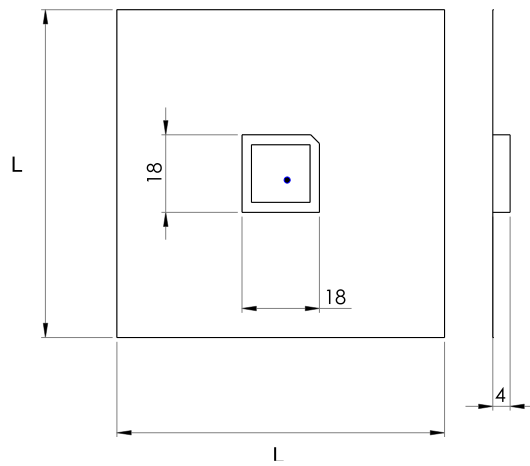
Drawing of the patch with the relevant dimensions (mm).
